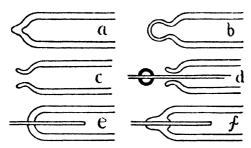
SEALING PLATINUM WIRE IN A TUBE (a to e)
